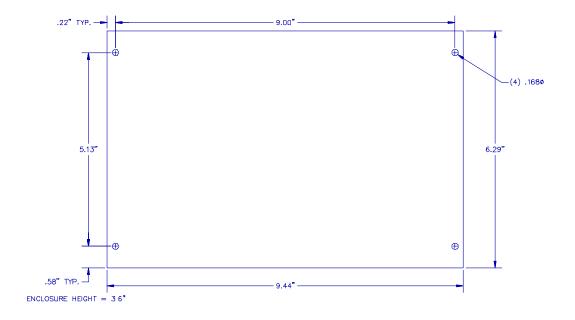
Enclosure Overall Dimensions Remote Track & Hold
